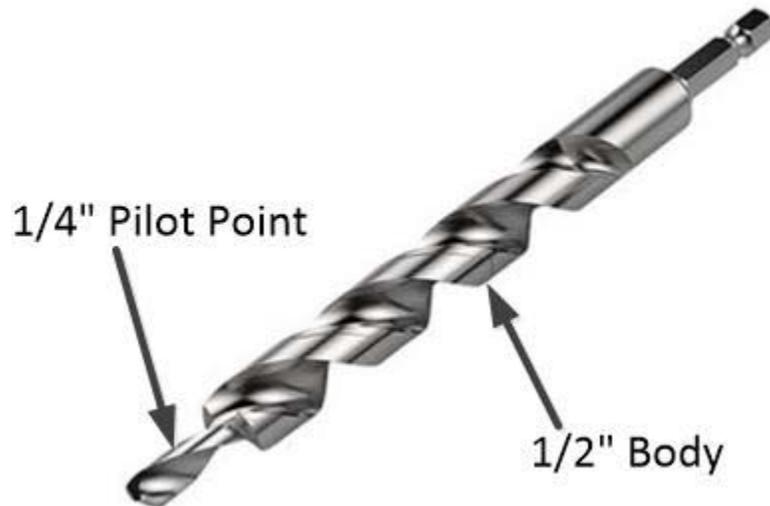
Kreg Jig® HD (Heavy-Duty) Drill Bit
